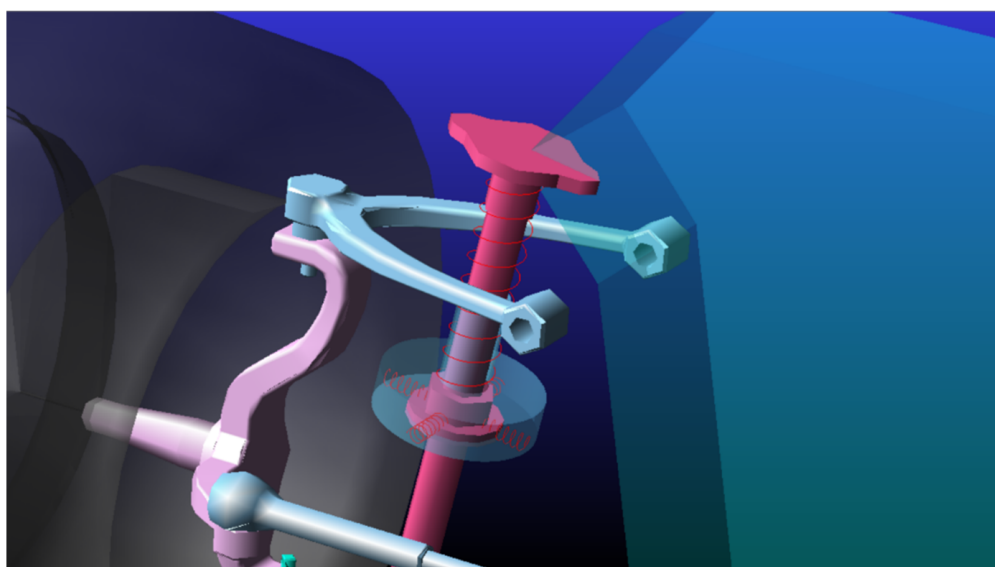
Spherical Joint of Upper Arm with Spindle Wheel—HP4.
